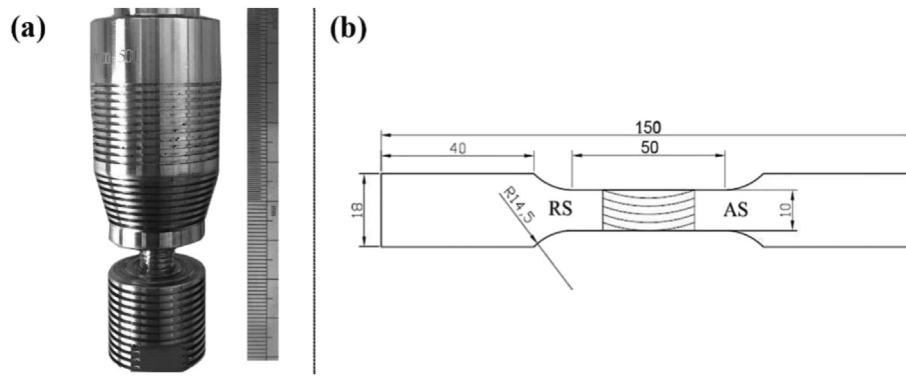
Configuration and size of (a) bobbin tool and (b) tensile specimen.
